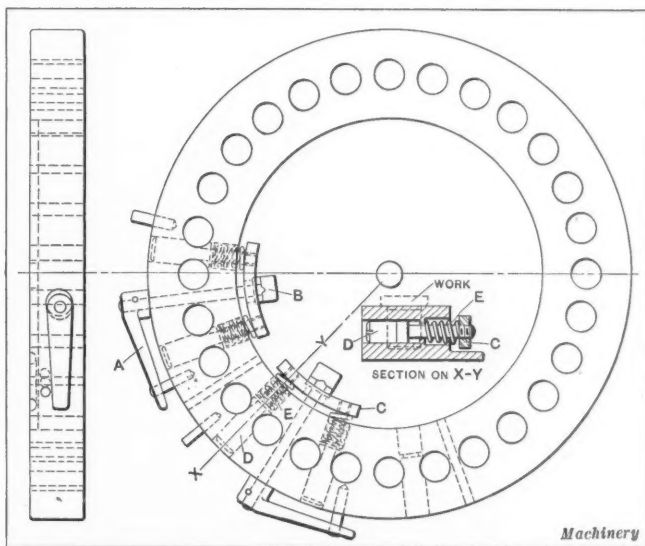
Special Fixture for holding Twenty-eight Bushings on Heald Rotary Surface Grinder for grinding Top Face of Flange
